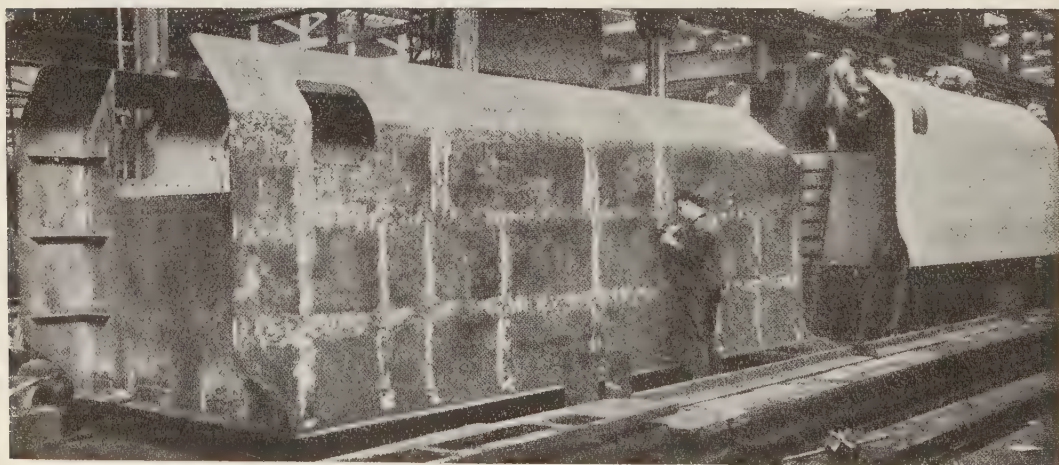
Welded tenders for streamlined express engines in the Crewe shops. — In foreground, removing surface irregularities with portable grinding machine.
